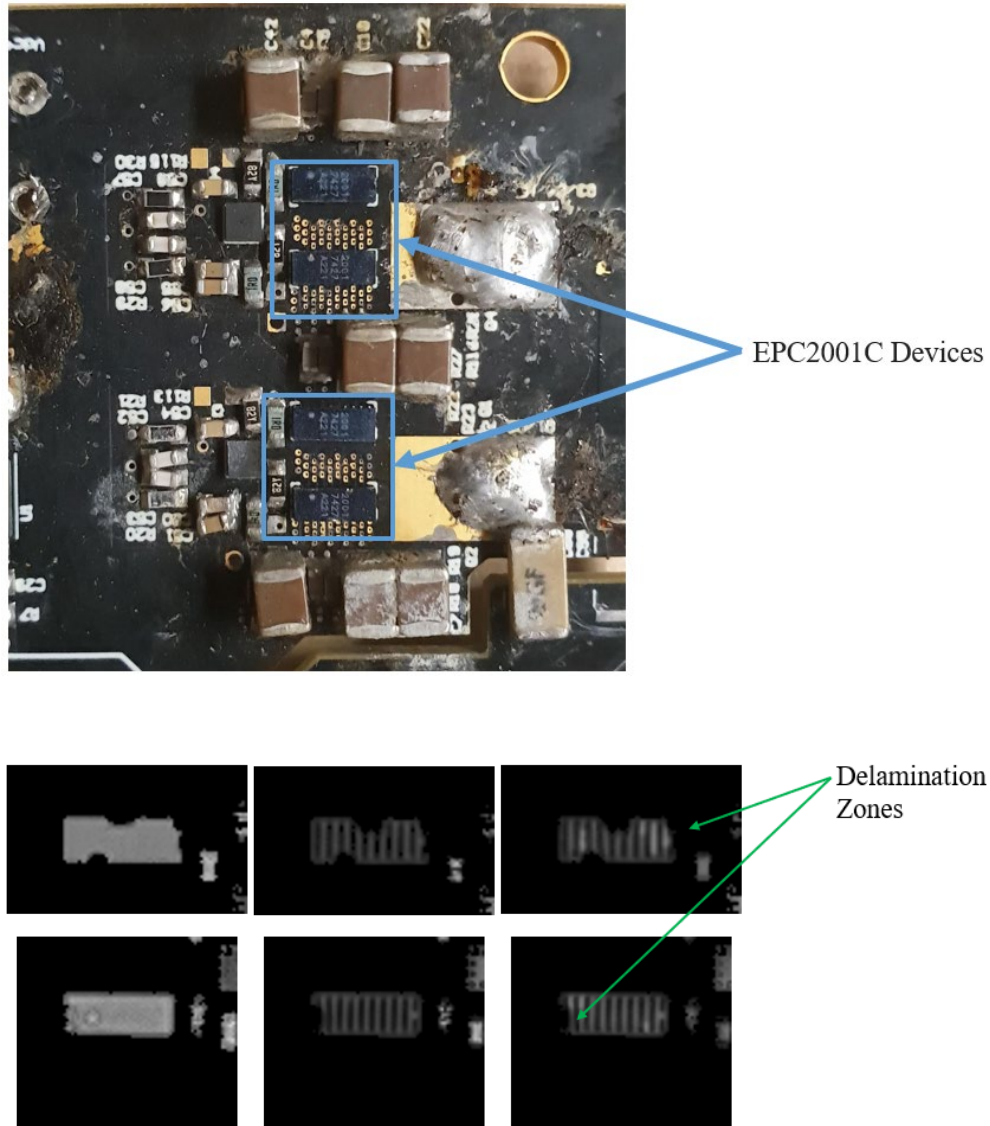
Failure Analysis of GaN MOSFETs to locate the delaminated solder bumps
